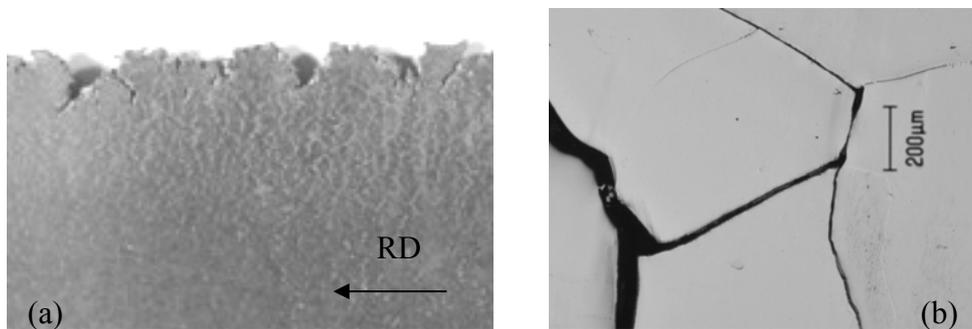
(a) Edge cracking on hot rolled specimen after about 80% reduction; (b) optical micrograph of as-rolled specimen showing grain boundary fracture.
